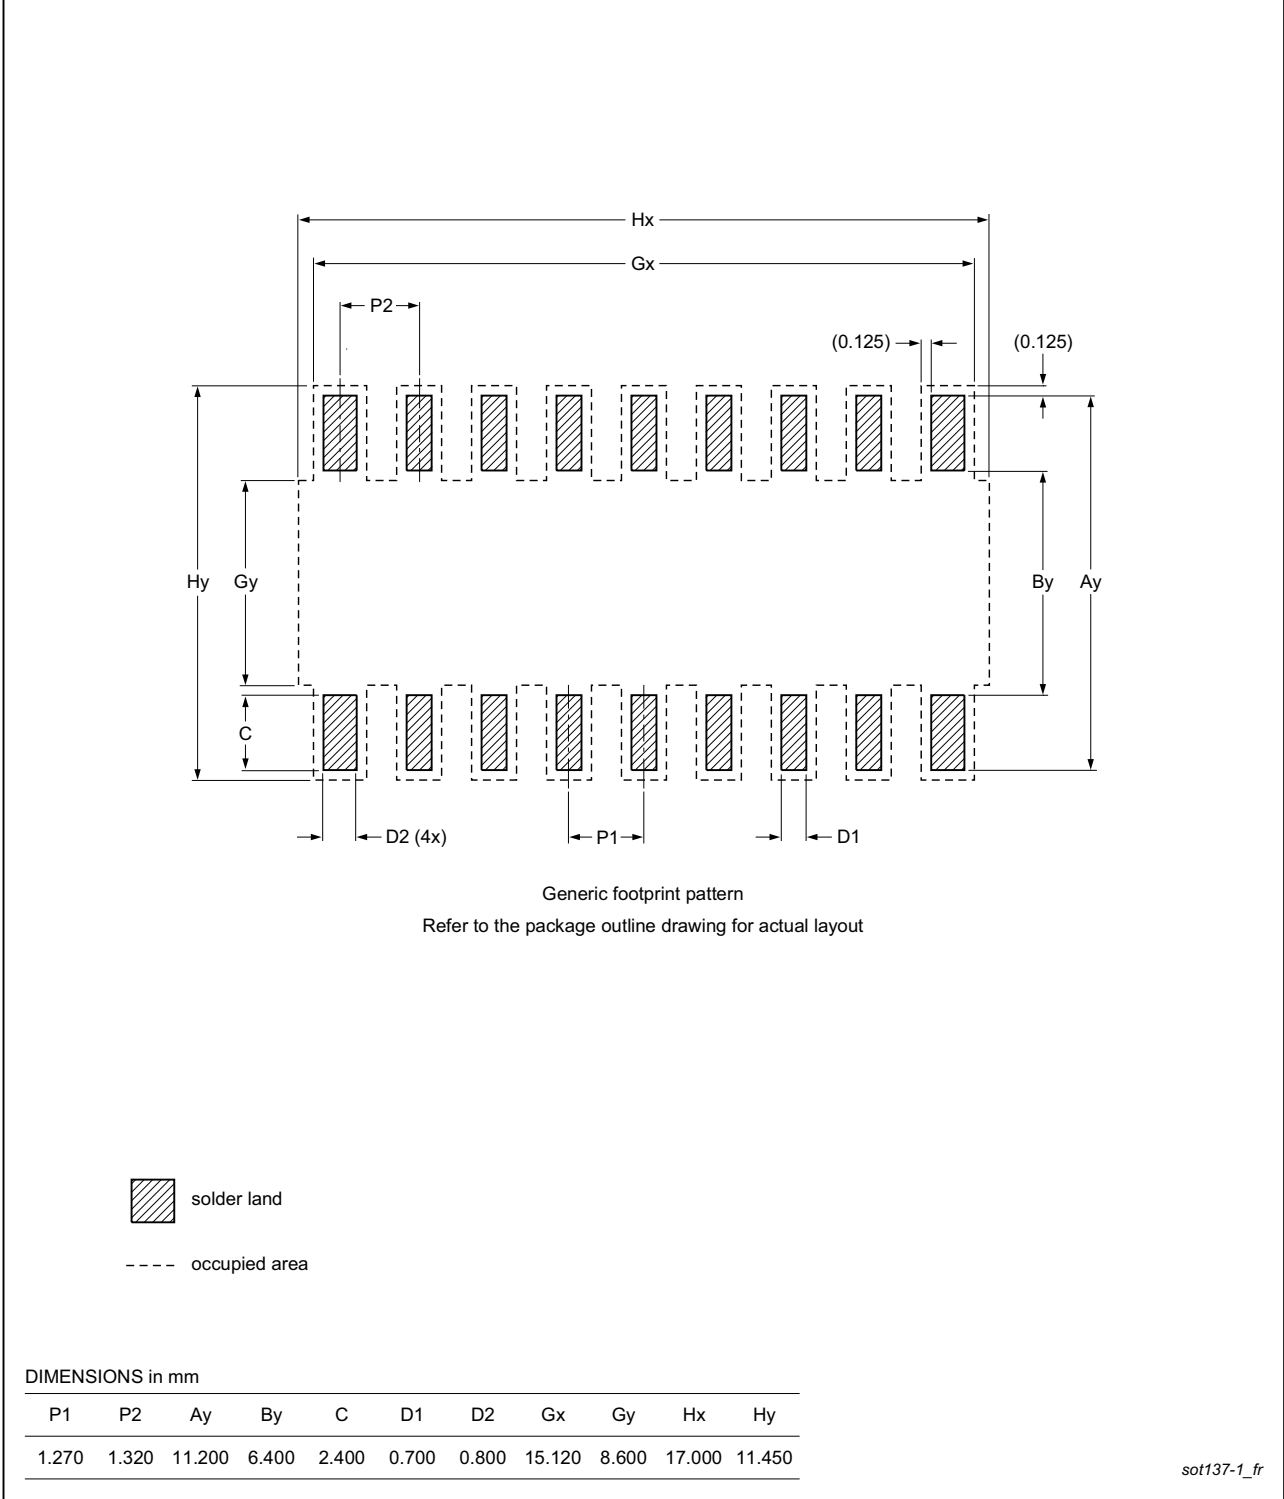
PCB footprint for SOT137-1 (SO24); reflow soldering
